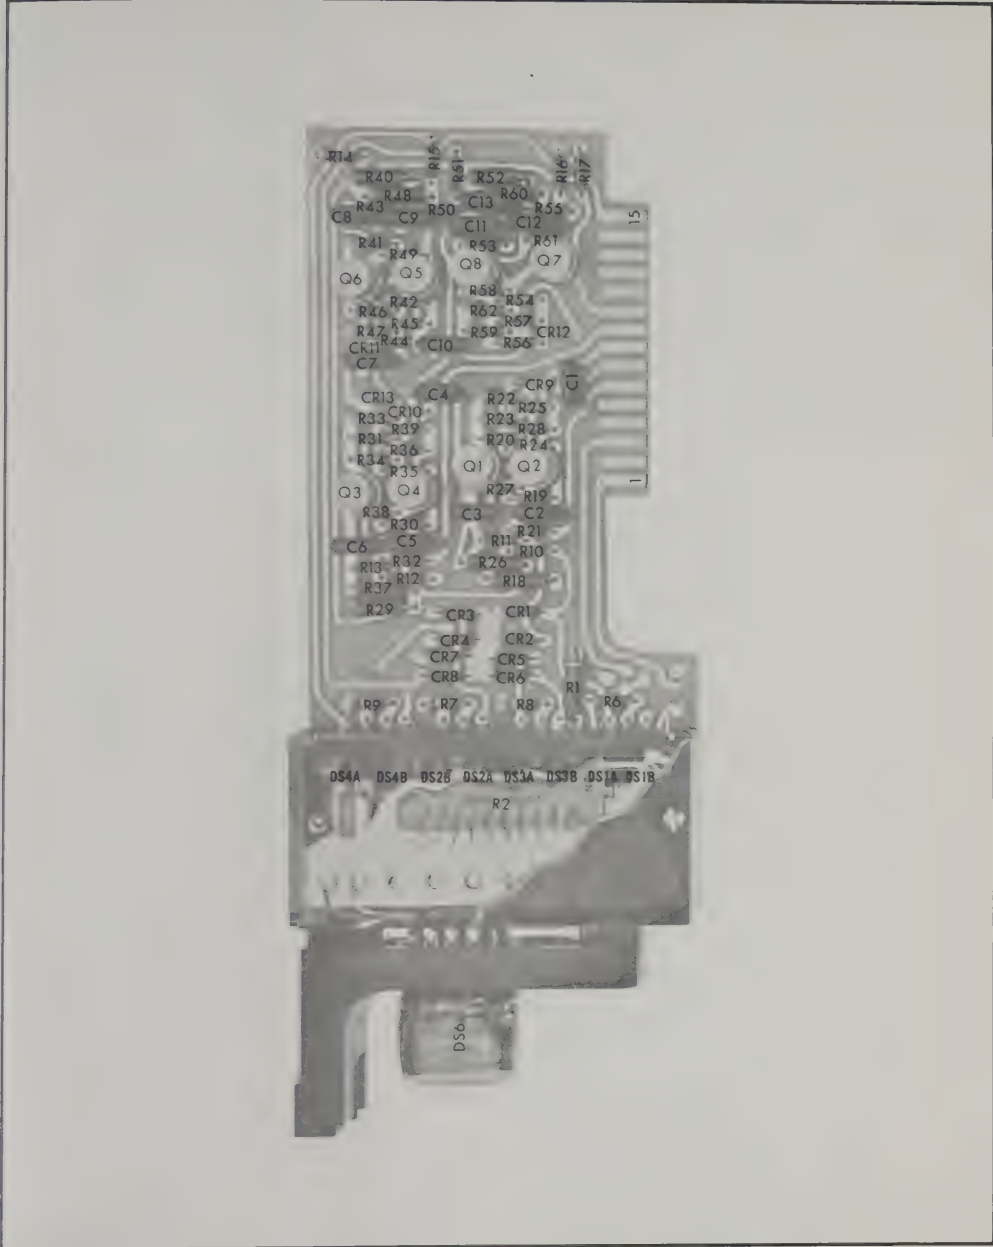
Decimal Counter Assembly A10-A14, Component Location
